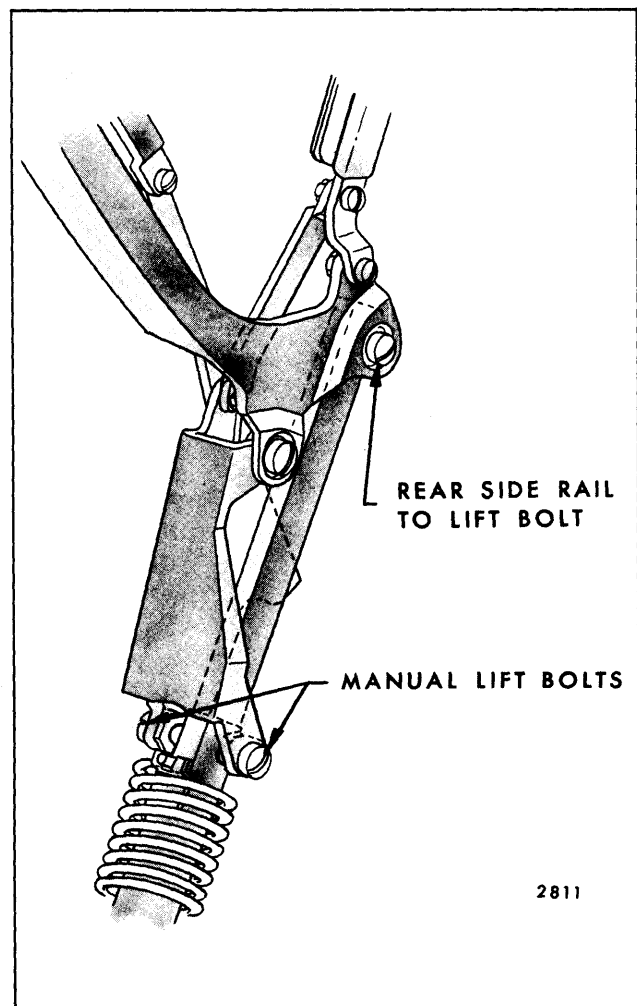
Folding Top Manual Lift Attachment - "A" Styles
